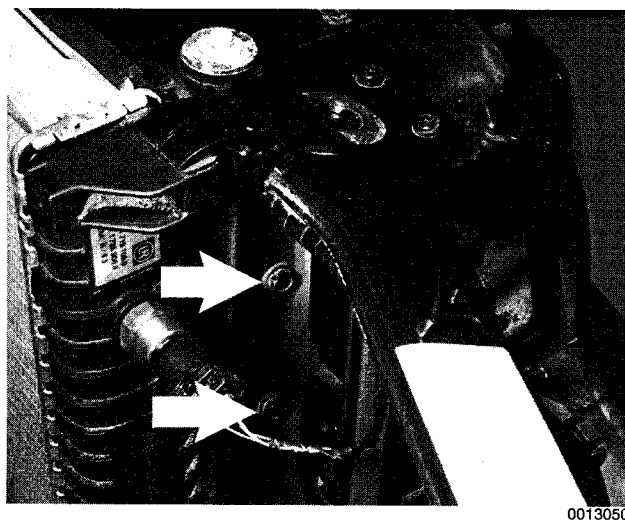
Front panel retaining screws at radiator (arrows). Right side shown. To remove left side screws it may be necessary to remove air filter housing or duct.
